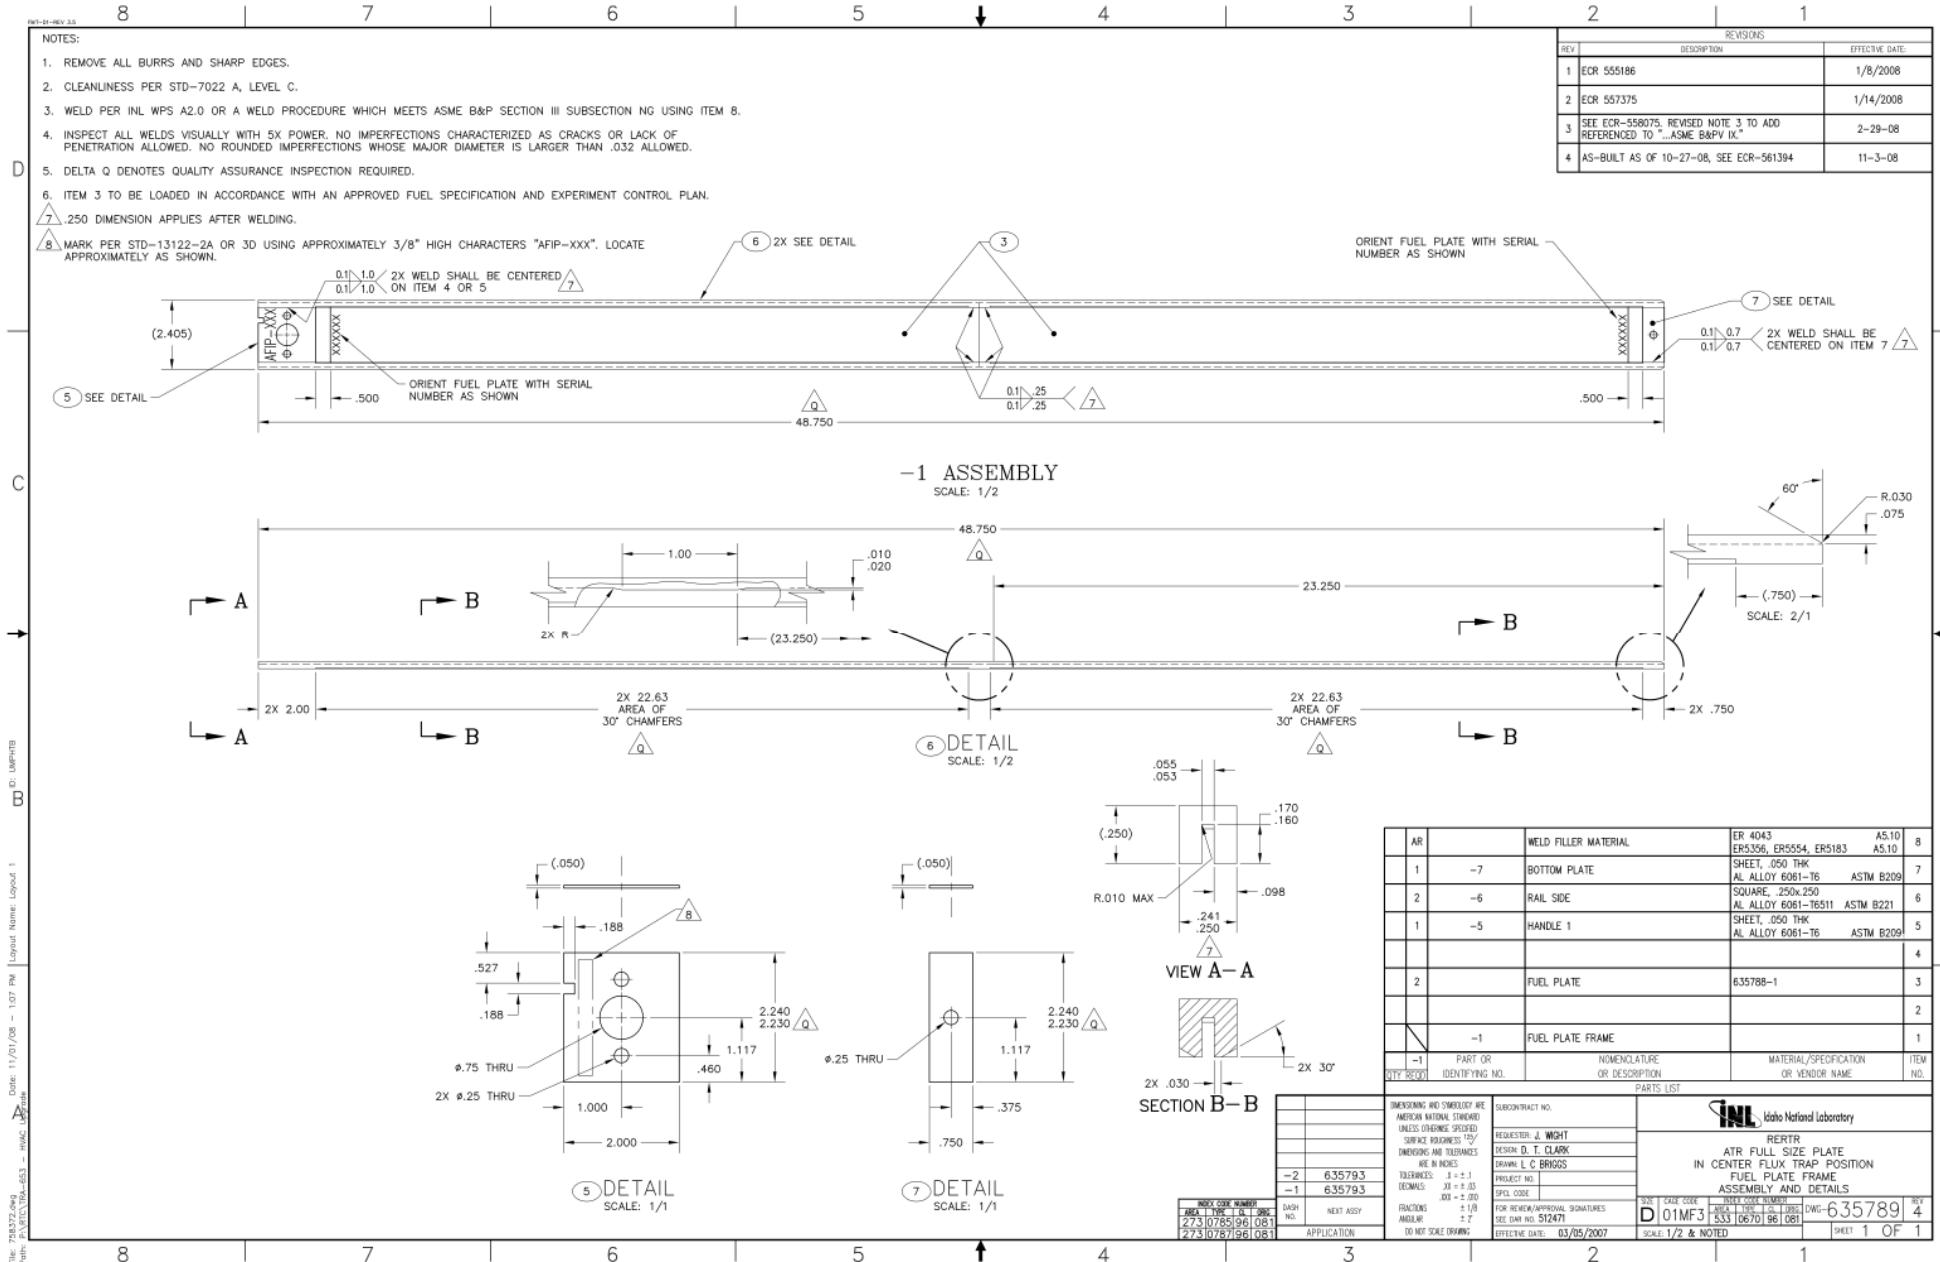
DWG-635789 REV 4 AFIP-1 Frame Assembly.
